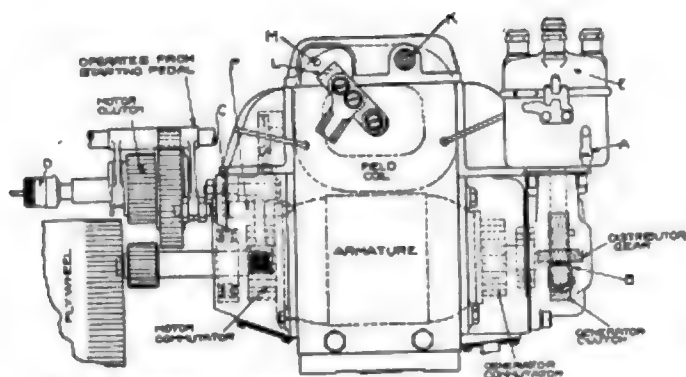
Side view of Delco dynamotor, which usually is called a motor generator
